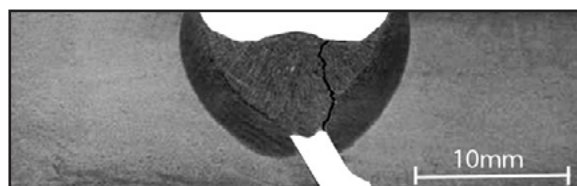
Cross-section of the wet MMA welded Tekken test piece made of S690Q steel; visible crack initiated in the weld root
